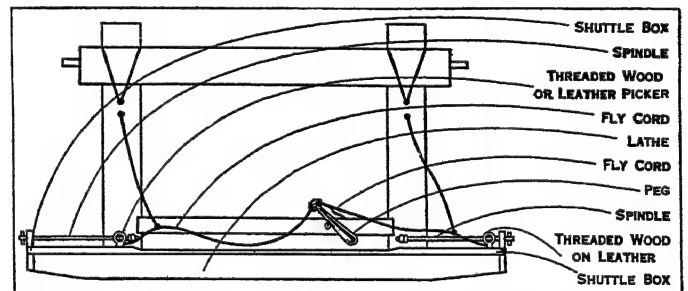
KAY'S FLY SHUTTLE SHOWING PARTS, INVENTED IN 1733 BY JOHN KAY
